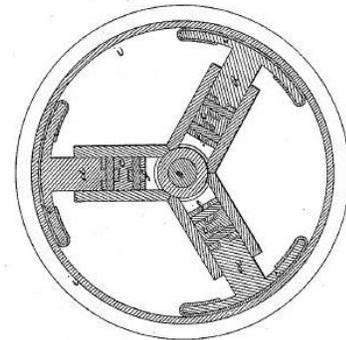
Reynolds' springless centrifugal friction clutch for a loom.
